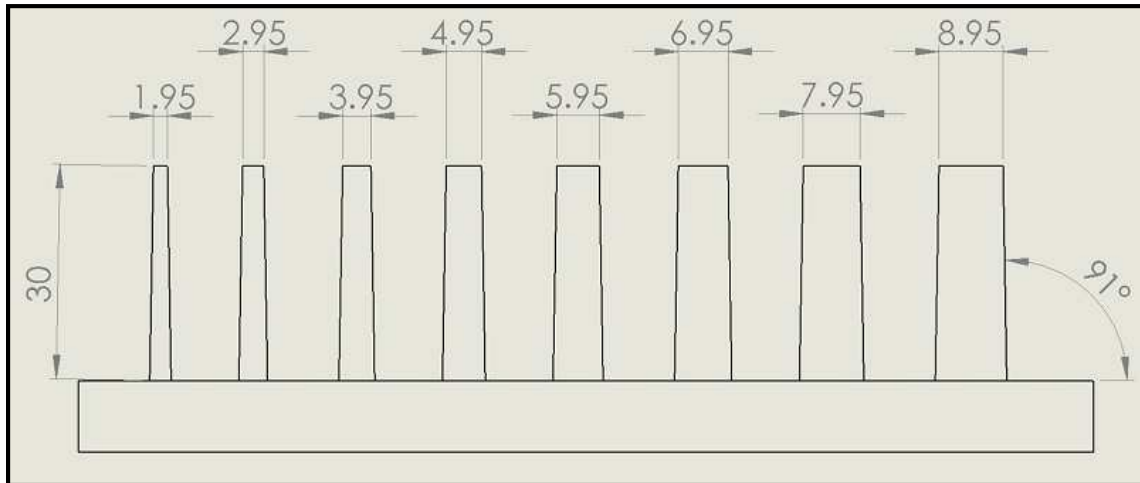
Test geometry 6: 2-D CAD drawing – with dimensions
